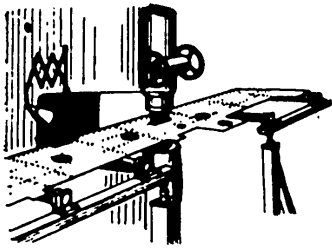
Riveting of a Panel on the Press KP-501A, Using a Roller Conveyer
